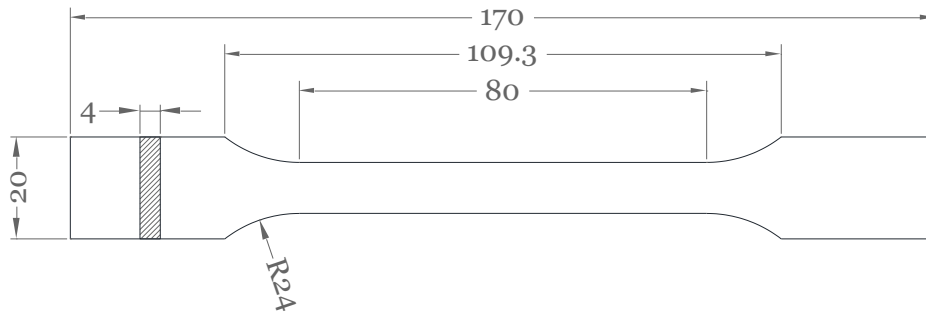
Dogbone specimen dimensions (measures in mm).
